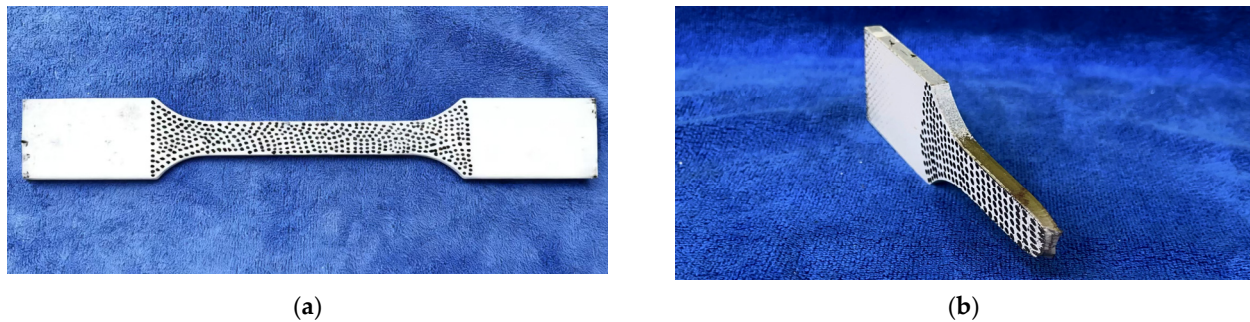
Test specimen. (a) Speckled pattern; (b) Fracture morphology after test.
